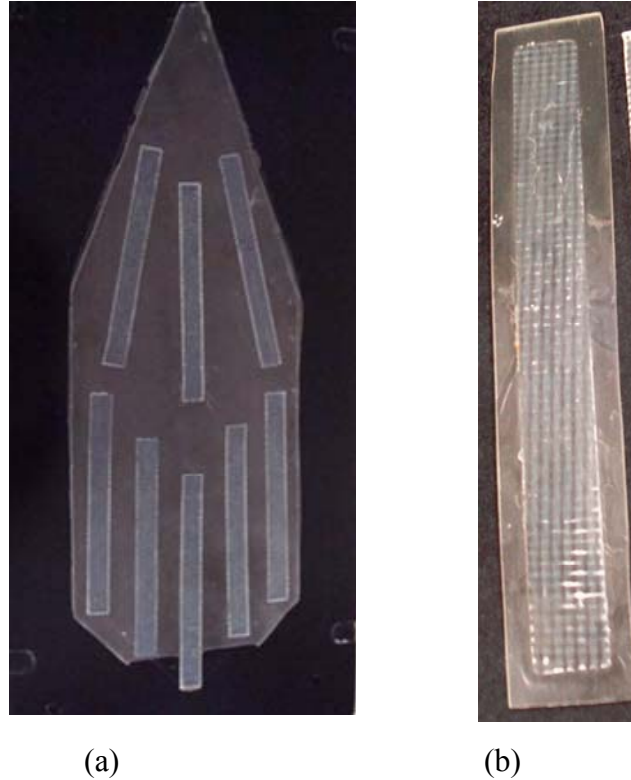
GFRP custom plane sheet preparation (a) a demoulded sheet from the second run of a vacuum infusion, and (b) a final GFRP custom plane sheet sample after cutting 4 mm border around each sample of image a.
